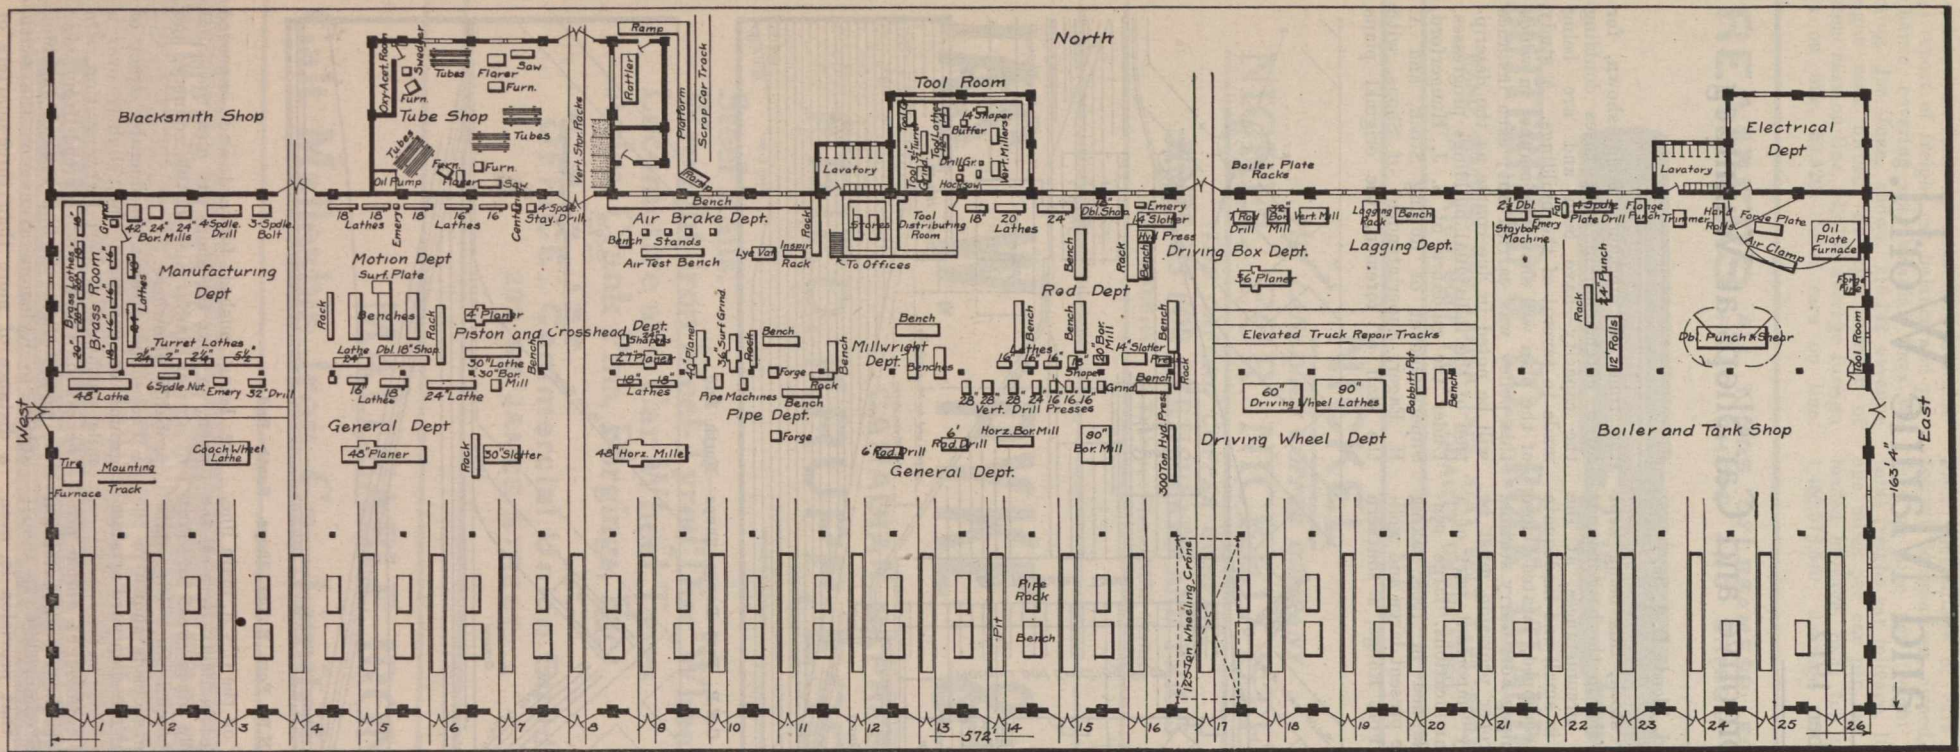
Interior Layout and Machine Tool Distribution in Machine and Erecting Shop.
